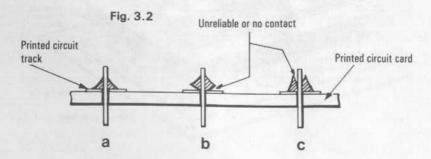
(b) and (c) show exaggerated profiles of unsuccessful joints. These can be caused by inadequate heating of one part, or the other, of the joint, due to the iron being too cool, or not having been in direct contact with both parts; or to the process being performed too quickly. An alternative cause might be contamination of the unsoldered surface.
